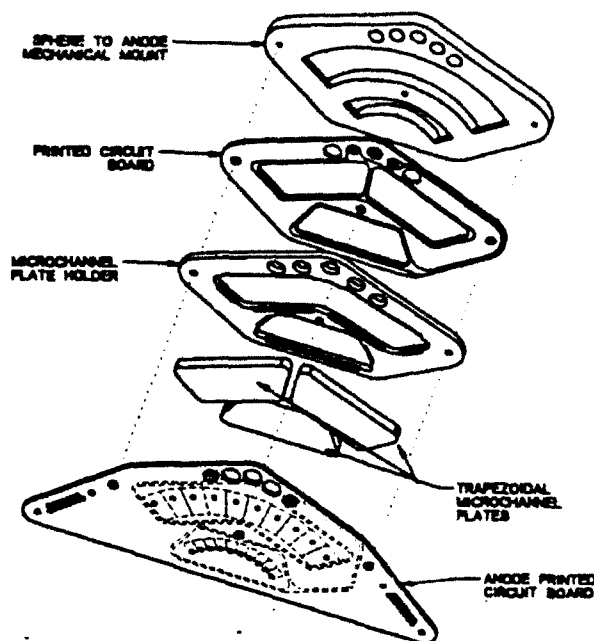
Exploded view of the microchannel plates, holders, mounts, and anode assembly.
